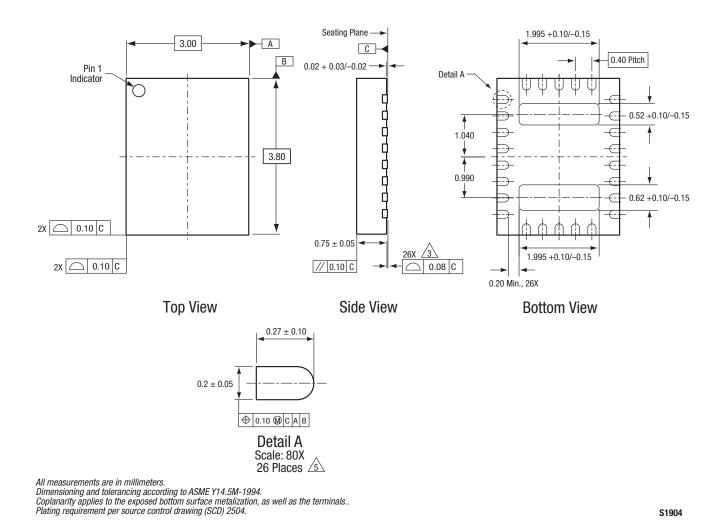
SKY13378-389LF 26-Pin QFN Package Dimensions
